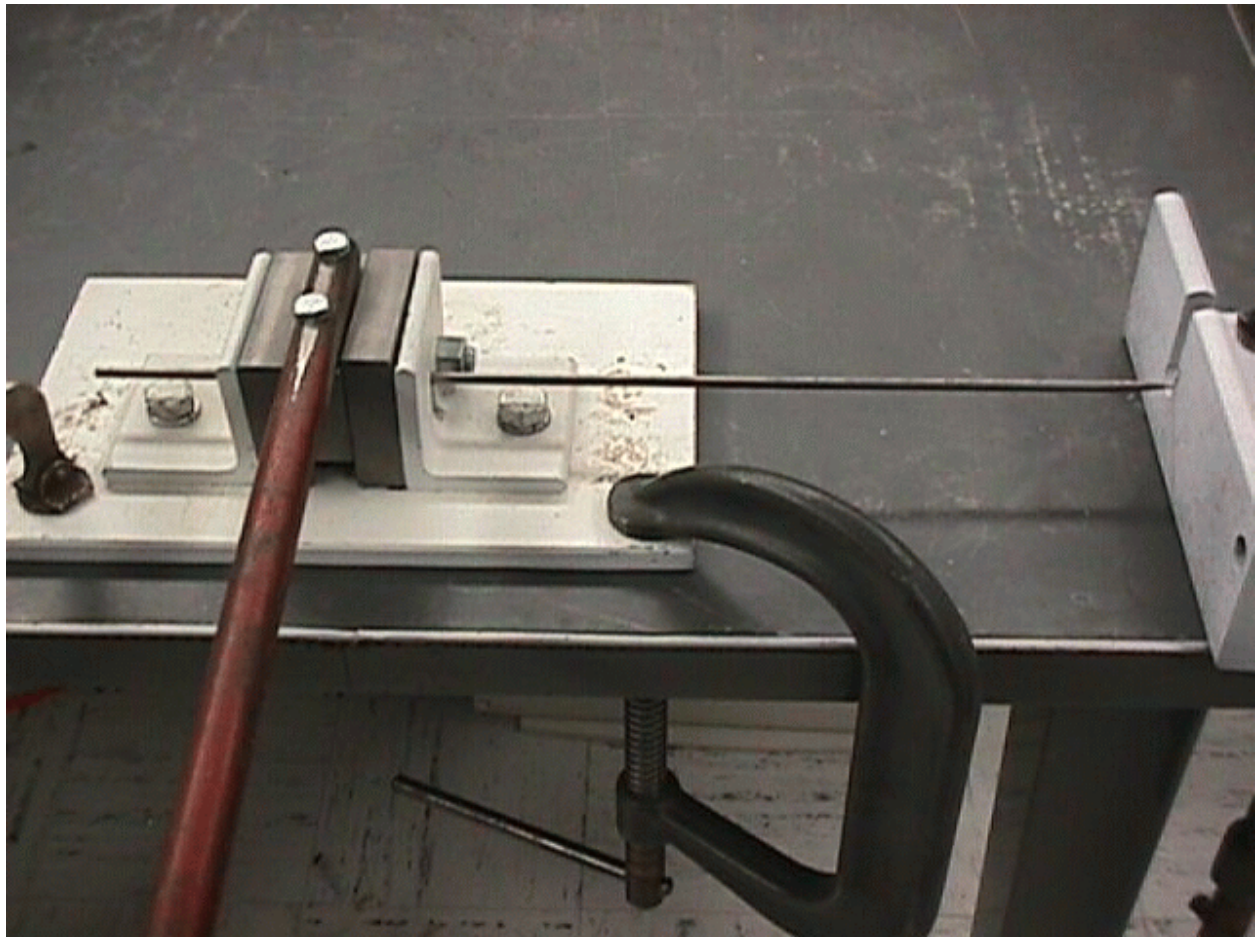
Rod shear being used to cut 3/16" rod. The stop at right is positioned using a master rod cut to the exact length desired. The master is inserted into the shear while the handle is in the down position so that the rod butts against the cutting face. Then the stop is positioned at the end of the master rod and clamped in place. A rod is cut by pushing it through the shear from the left hand side until it reaches the stop positioned on the right side. The handle is depressed to shear the rod. The cut rod is extracted by bending it slightly so that it passes through the vertical slot in the stop. Instructions given here are for building a shear for 1/8 inch rod.
